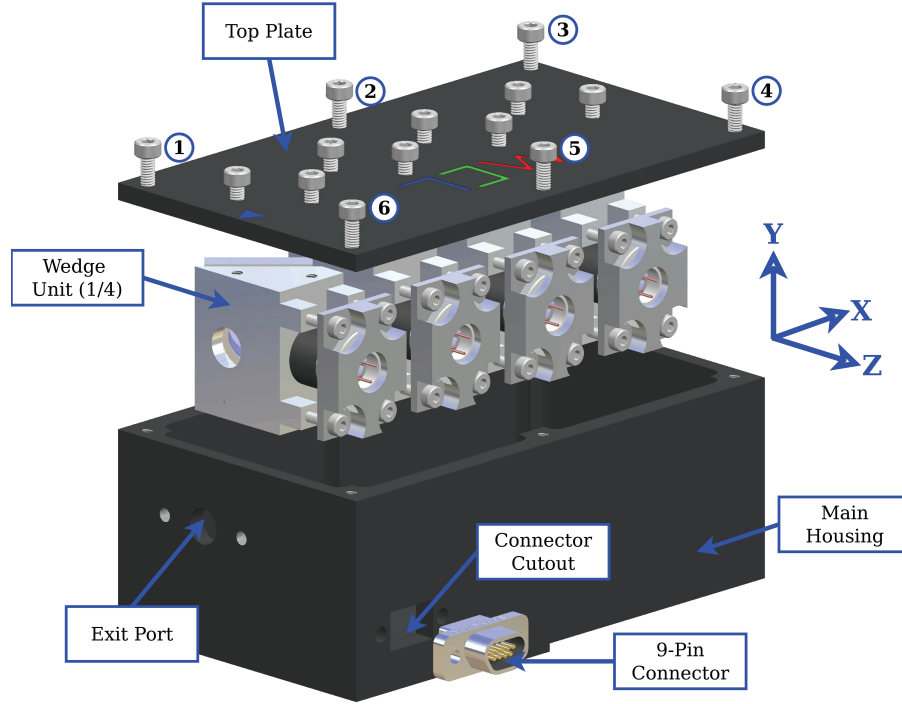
An exploded view of the multicolor laser. The top plate, which secures the wedge units, gets mounted to the main housing via screws 1-6.
